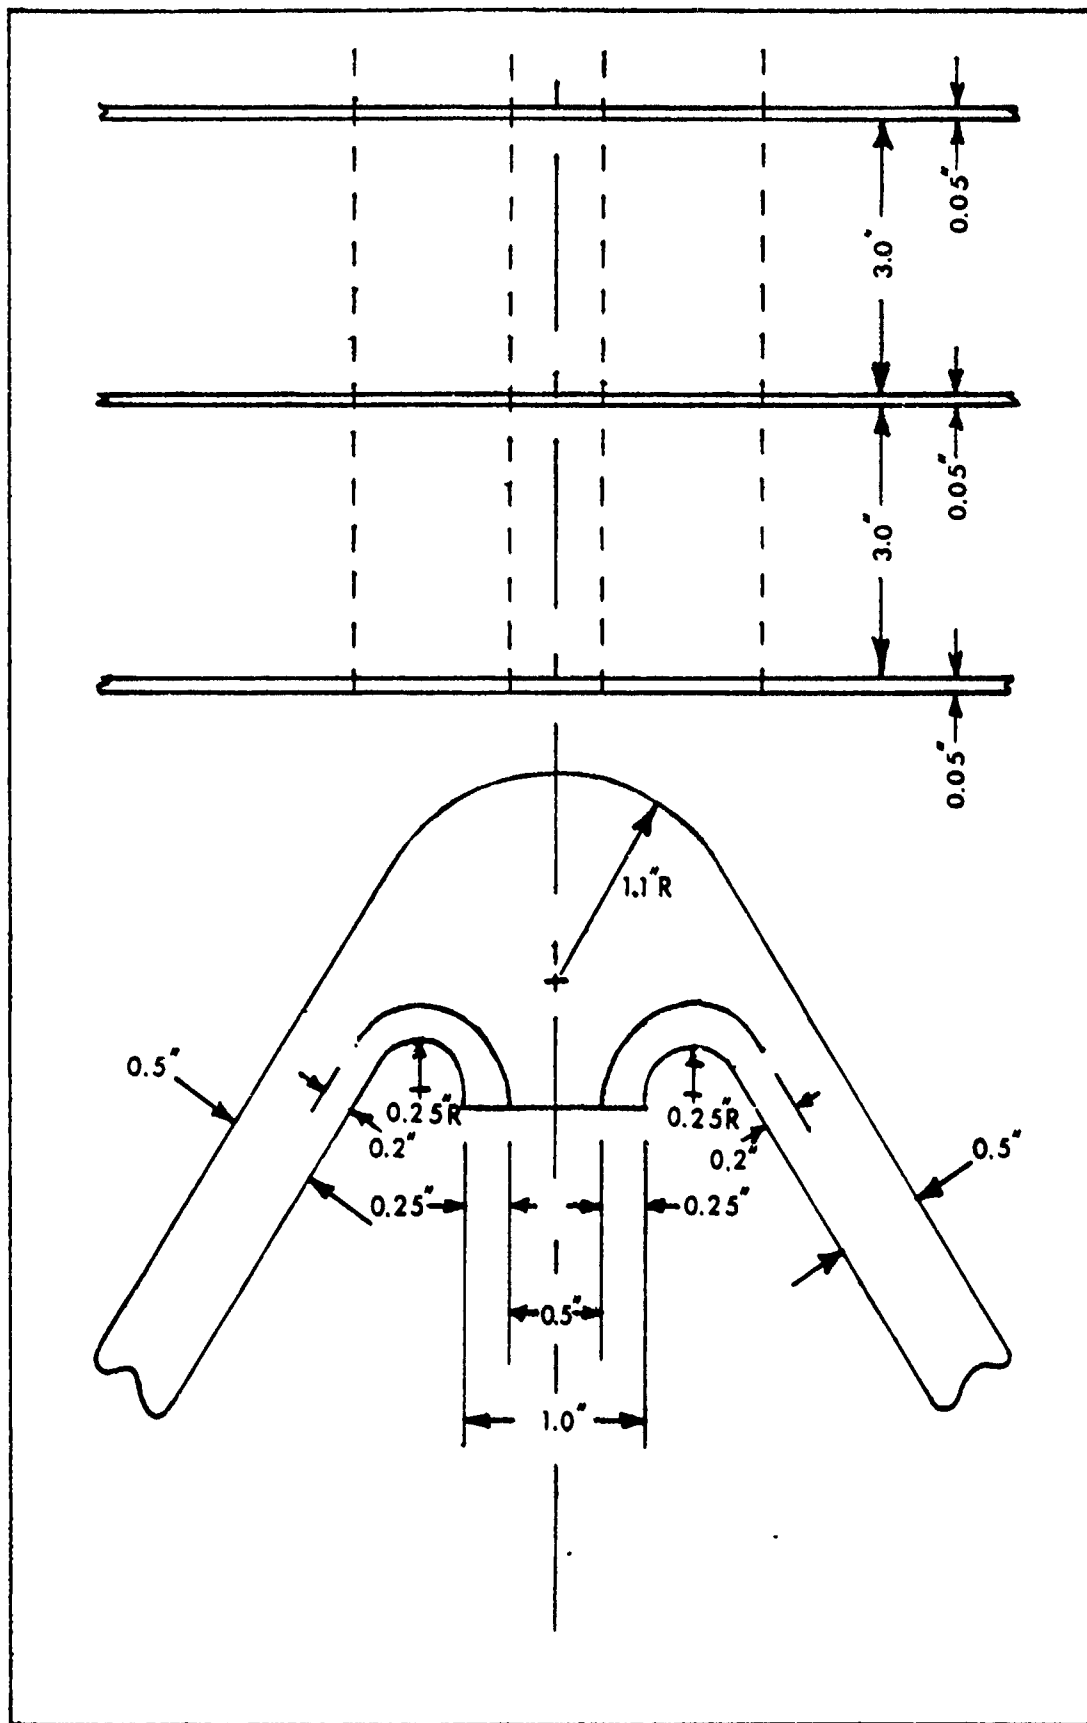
DIMENSIONAL ILLUSTRATION OF SHROUDED SPACERS AND BAFFLES
